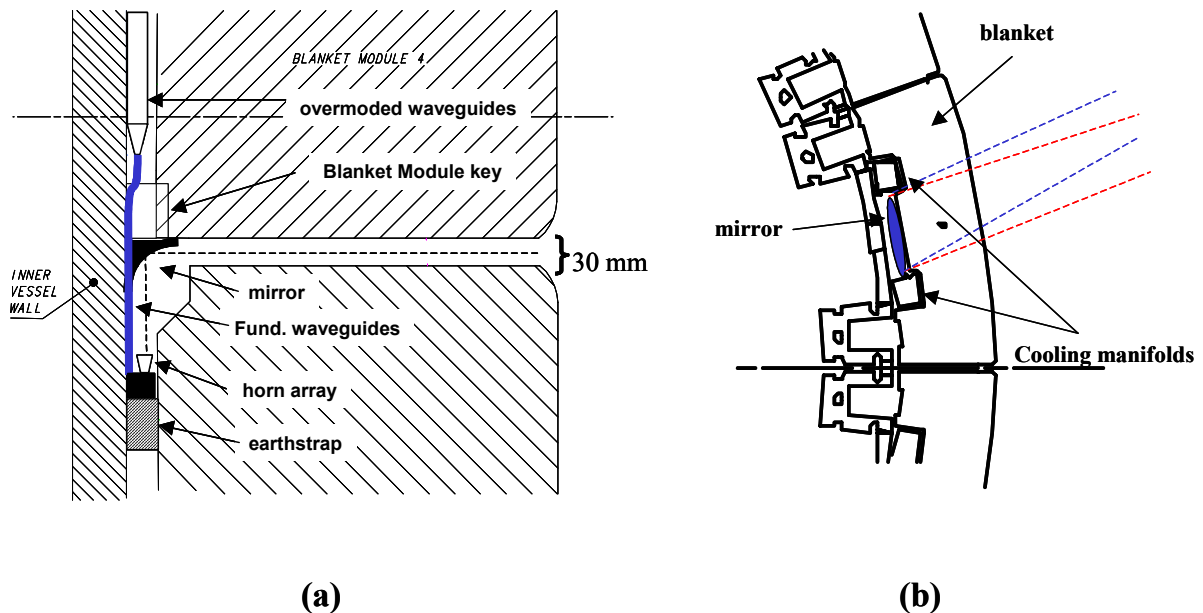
(a) Cross section of blanket modules 3 and 4 with mirror, horn array and waveguide assembly. The vertical distance between the blanket modules gap diameter is 30 mm as shown. (b) Top view of mirror located behind the blanket module between the cooling manifolds.
